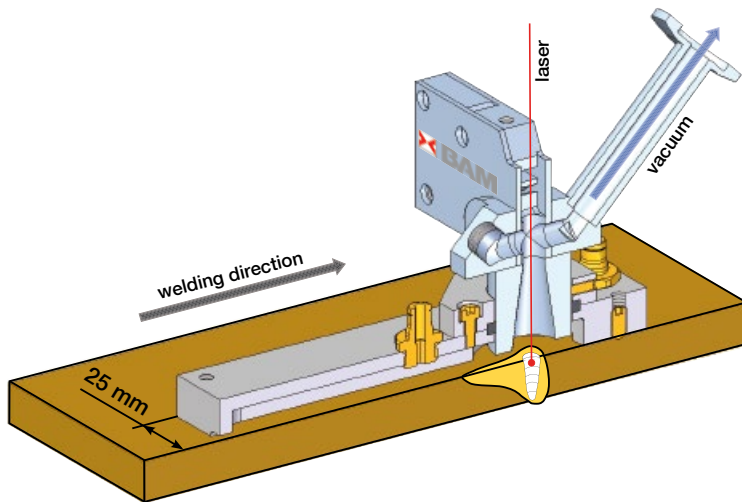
Section drawing of the vacuum cap with weld pool.
